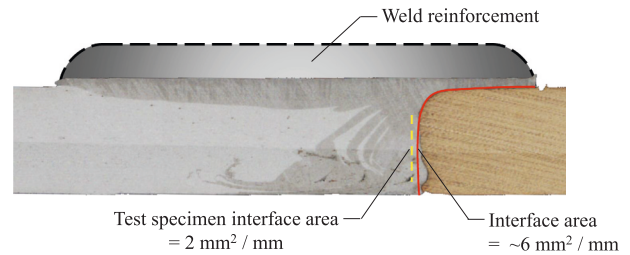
Illustration of reinforced weld and weld interface area highlighted. Highlighted area shows as manufactured weld interface area (red) and weld interface area (yellow) of resistance measurement test specimen. (For interpretation of the references to colour in this figure legend, the reader is referred to the web version of this article.)
